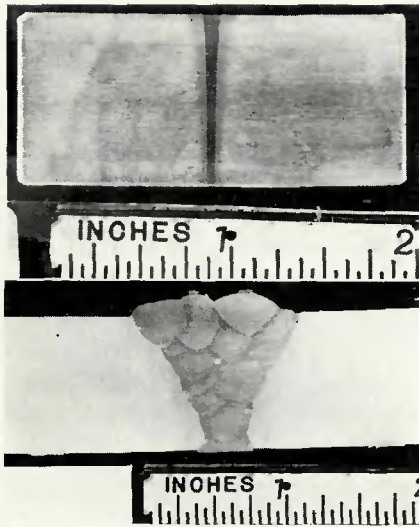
Photomicrographs of aluminum alloy 5086-H116 welds: A (top)—electron beam; B (bottom)—gas metal arc
